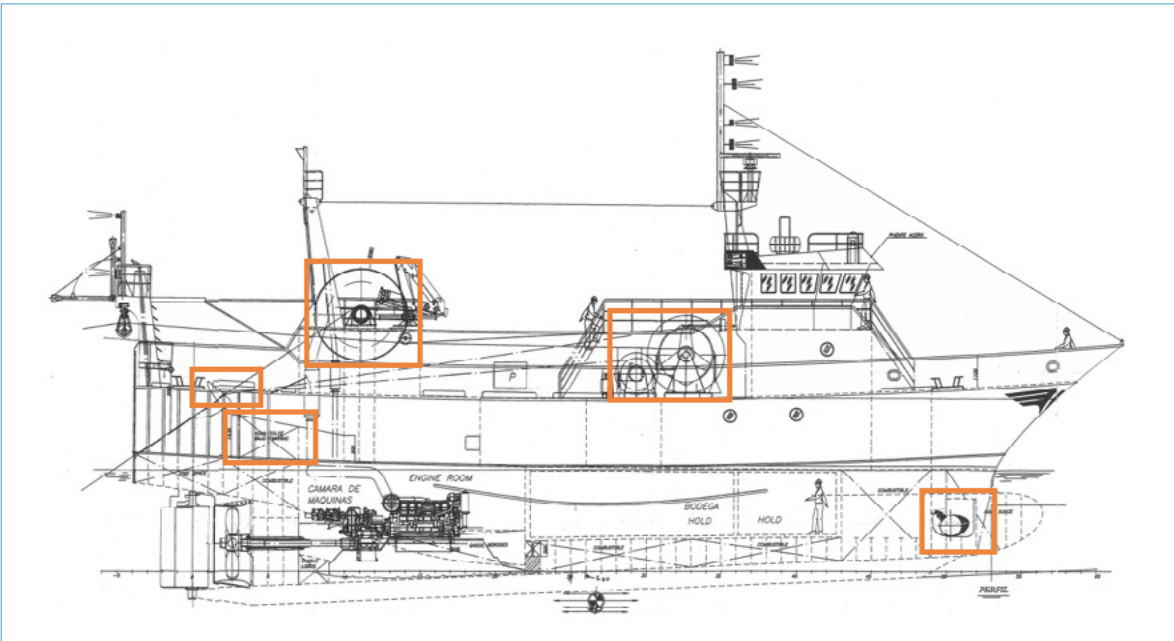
Ship plan under Dutch flag - side elevation (2018). (Source: Stability book UK-160)
